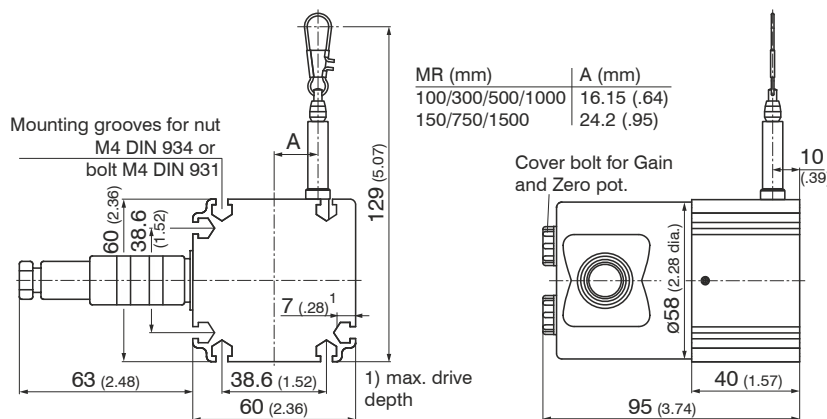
Dimensional drawing ... - FD60 - SR - U/I, dimensions in mm (inches), not to scale
